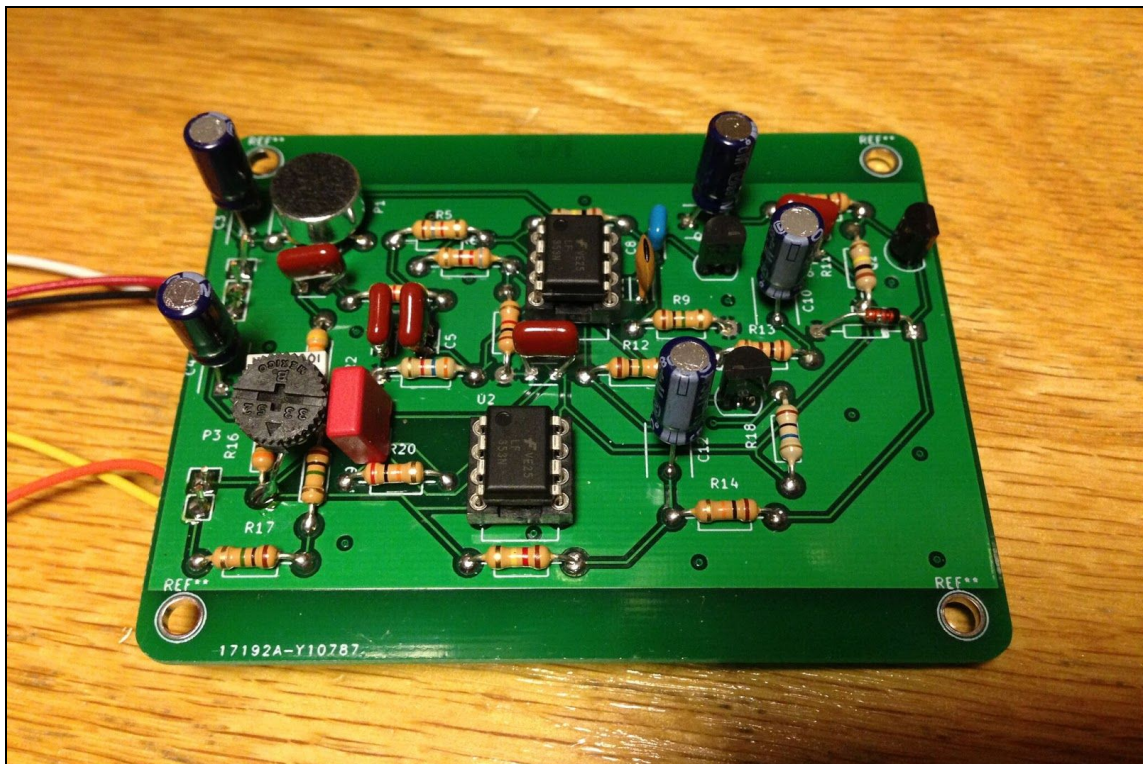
Working PCB. Fully populated and functioning PCB including signal conditioning and VCA circuits
